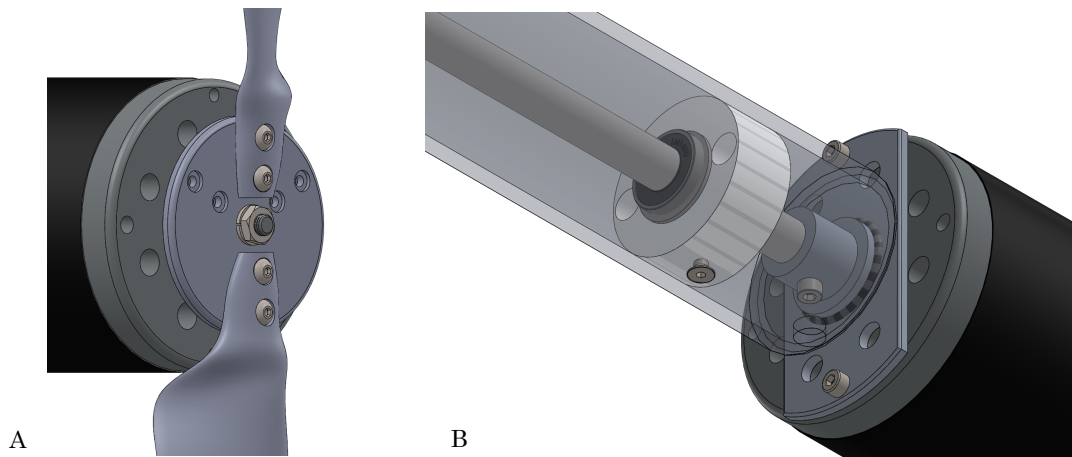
A: The propeller blades are connected to the hub with two M5 screws each. Dimensioning of the hub and propeller blades are outside the scope of this thesis. B: Connection of the motor to the shaft. An aluminum plate is bolted on the motor which is connected to the shaft through a M5 screw and a welded hub.
